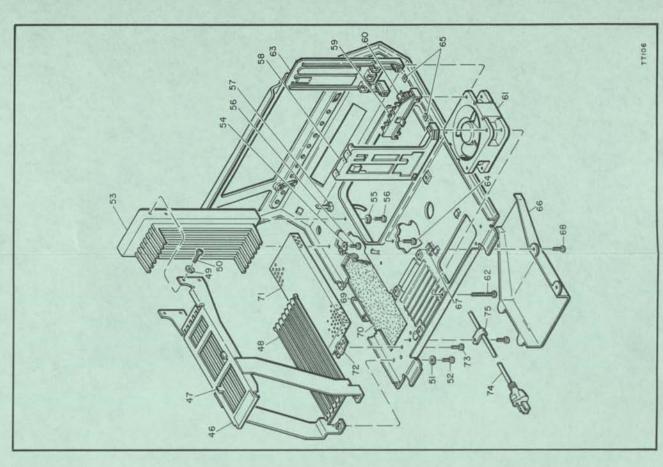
Cabinet Assembly (Sheet 3 of 3)
